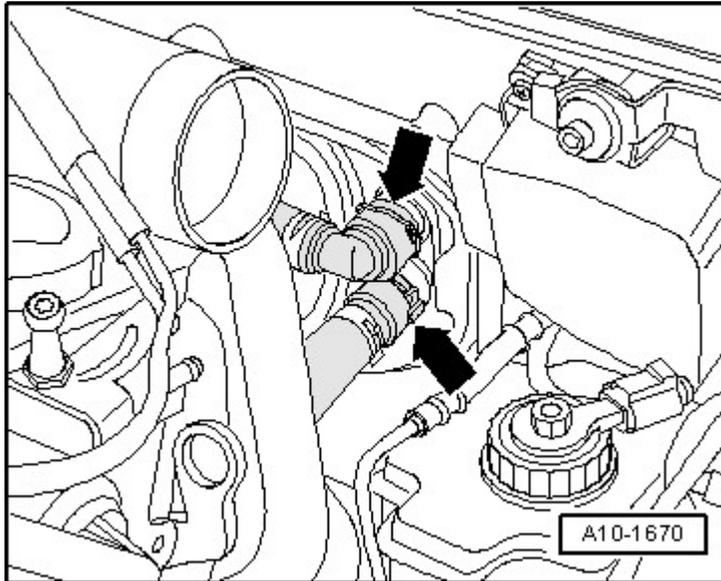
Disconnecting Coolant Hoses To Heater Core At Bulkhead
